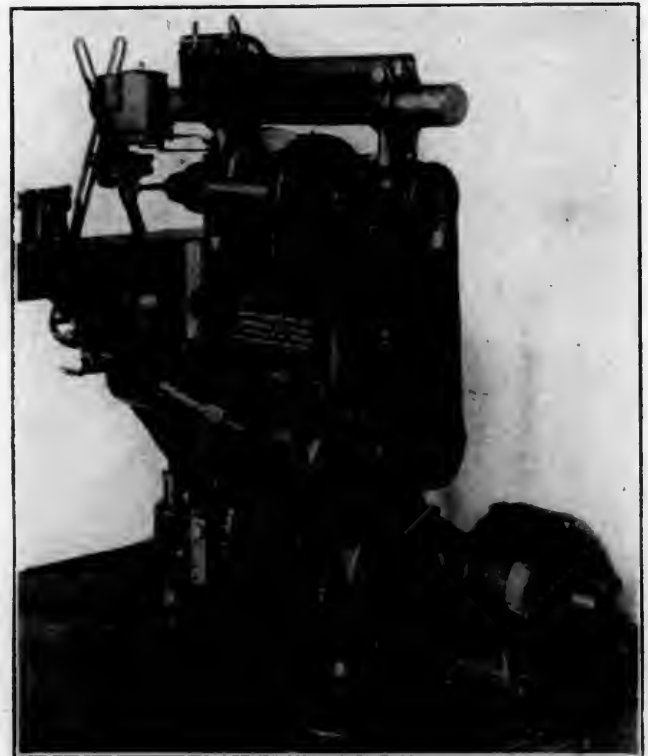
CONSTANT-SPEED DRIVE FOR A UNIVERSAL MILLING MACHINE USING CHANGE GEARS FOR SPEED CHANGES—BROWN & SHARPE MFG. CO.—GENERAL ELECTRIC MOTOR.
